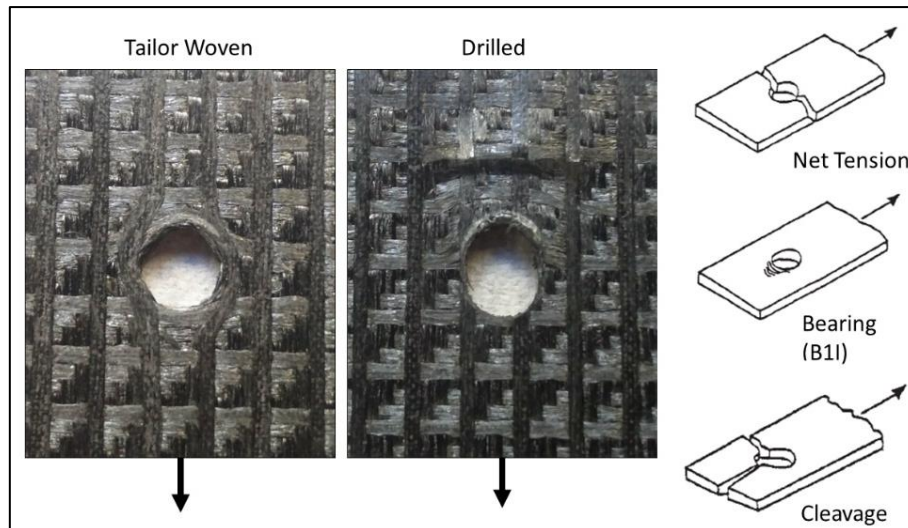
Specimen with bolt removed after testing. Examples of typical failure modes are displayed (right) of which bearing failure is the only acceptable type for determining the composites response[34].
